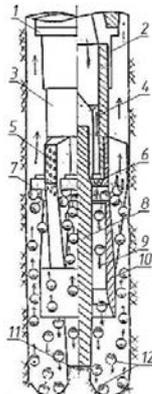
“PIM-216” tool string with the nozzle and circular mixing chamber [5]
